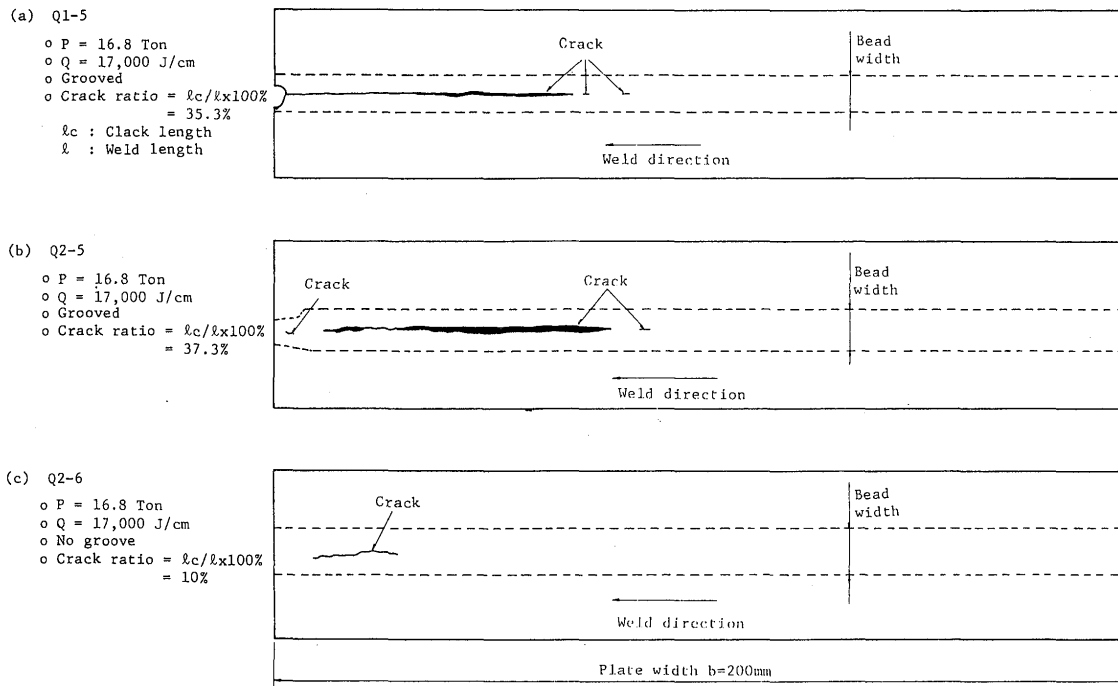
State of weld cracks (sketch from RT films)
